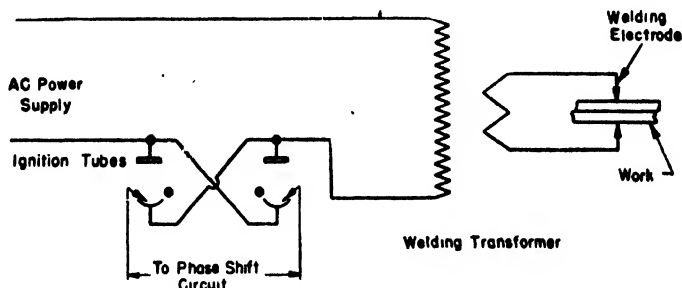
Elementary diagram of a welding circuit using Ignitron power tubes.
